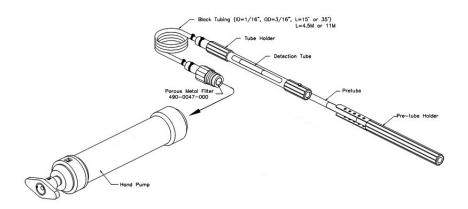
Installation of the remote sampling probe into the LP-1200 hand pump.
